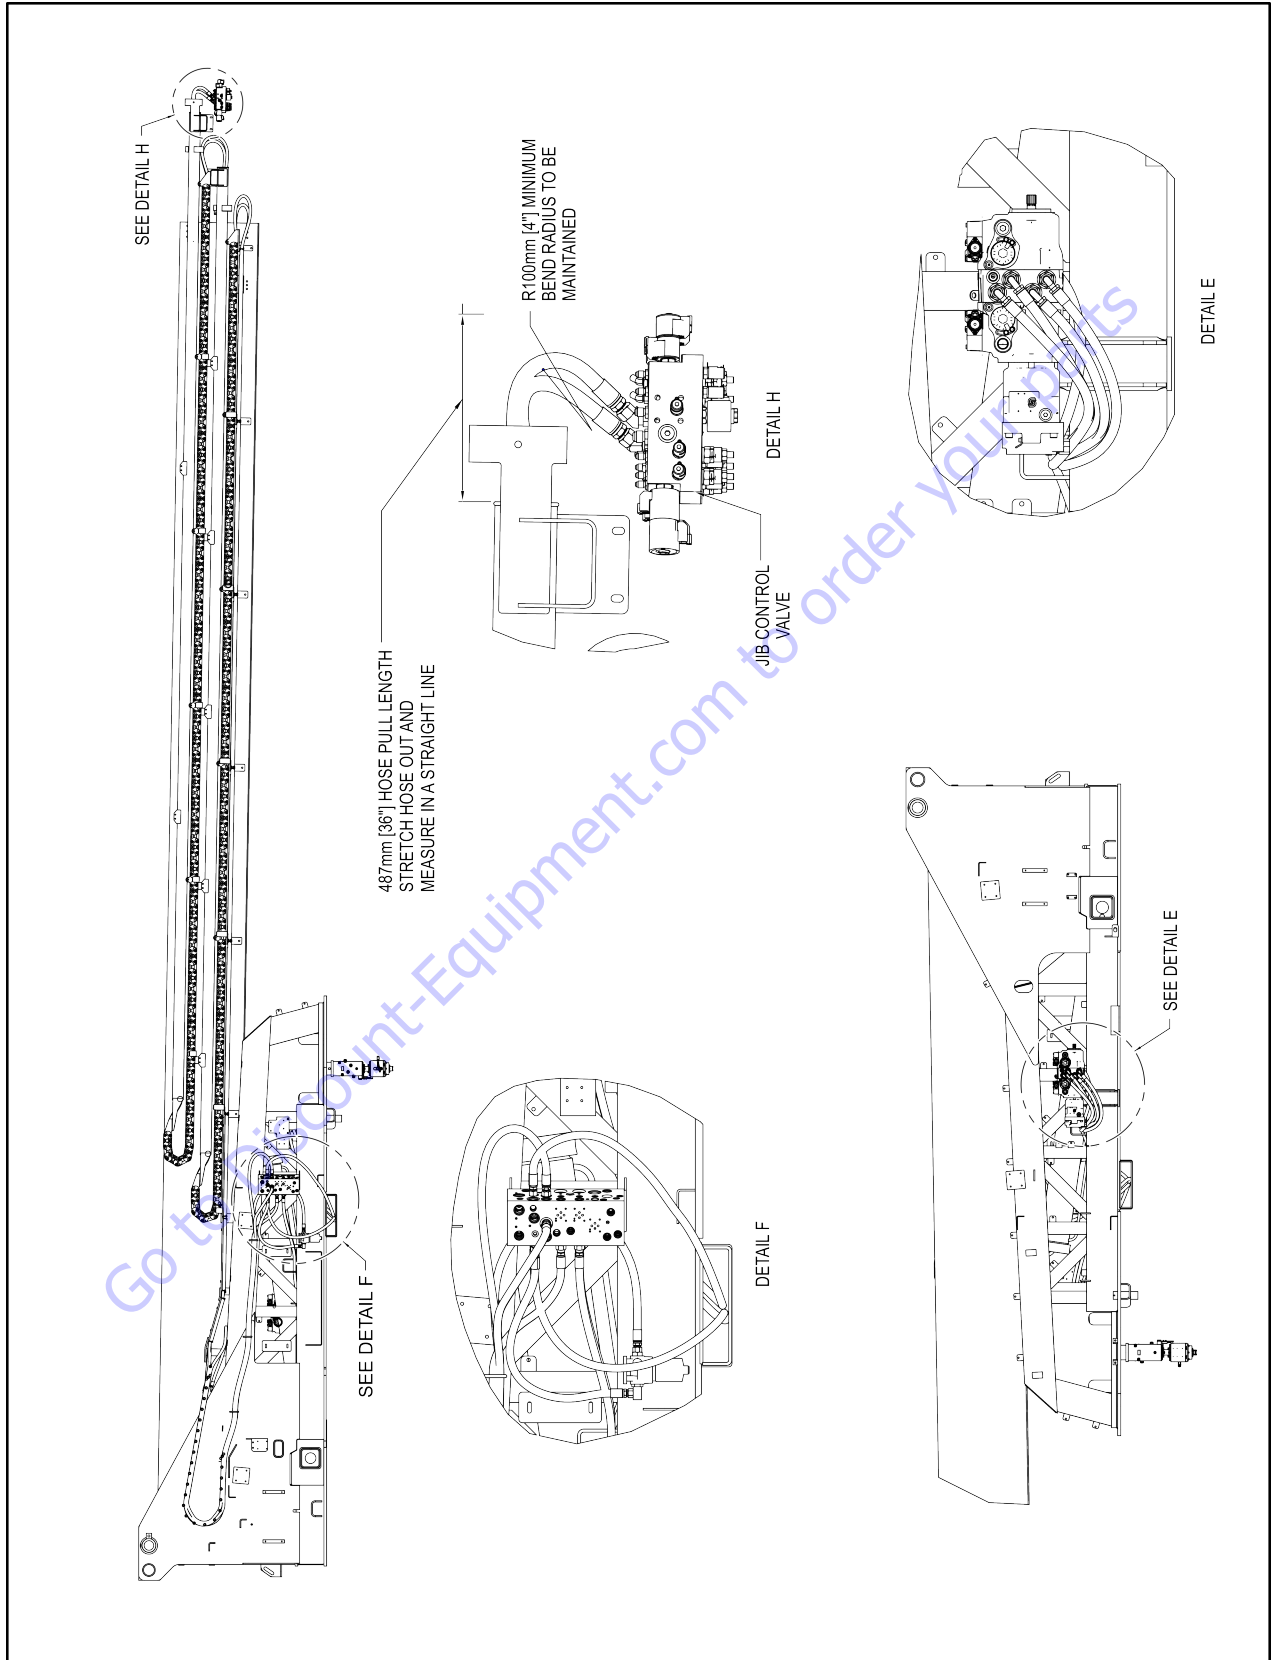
Hydraulic Hose Installation - Sheet 1 of 8
